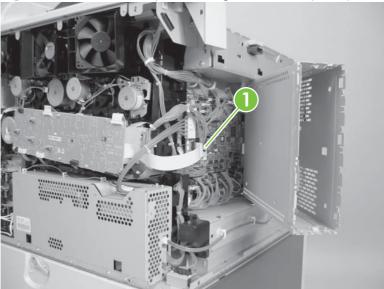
Remove the print-cartridge driver PCA (2 of 3)
